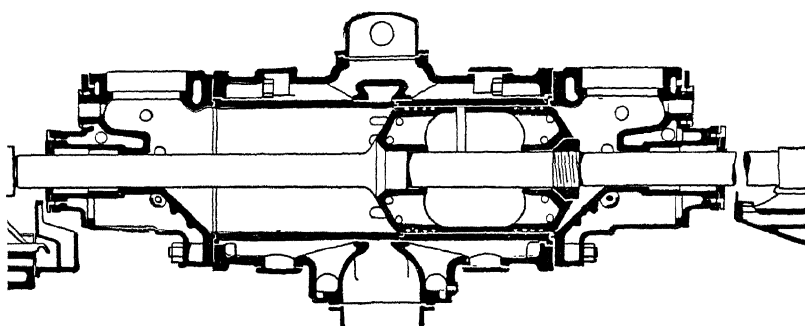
WORKING-CYLINDER OF KÖRTING ENGINE OF THE MASCHINENBAU-AKTIENGESSELLSCHAFT, FORMERLY KLEIN BROTHERS, DAHLBRUCH.
